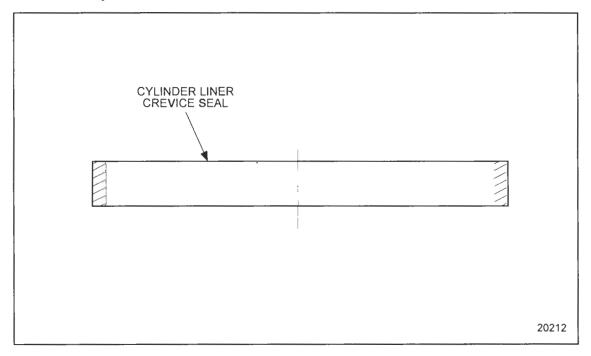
Cylinder Liner Crevice Seal Cross-section
